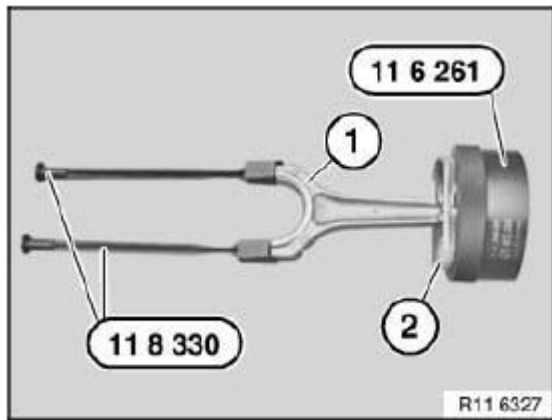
Identifying Piston And Connecting Rod With Special Tools (11 8 330 And 11 6 261)
